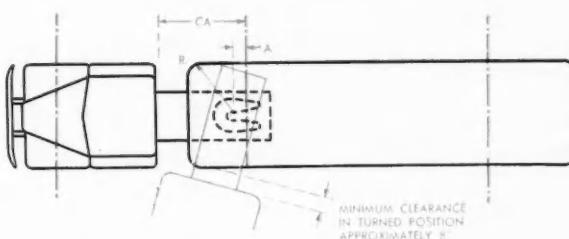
Diagram showing cab-to-body clearance, a factor in tractor wheelbase and fifth-wheel location
